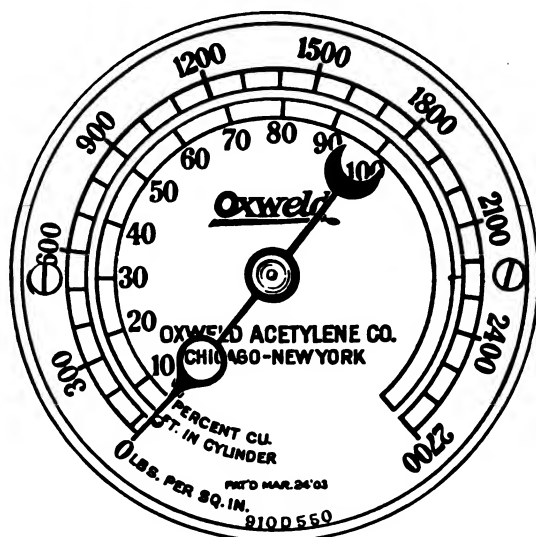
Dial of High-Pressure Gage of Oxygen Regulator
